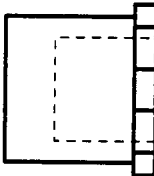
/ 6218 REDUCER BUSHING – SPIG x SOCKET
